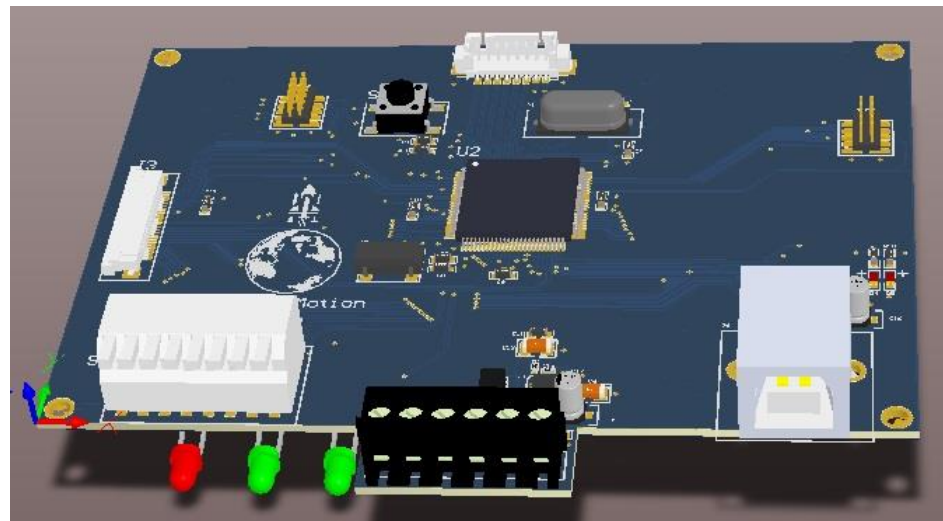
SIDE view 3D Model of 1C601 Control Board
